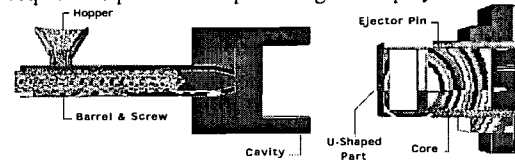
Injection Molding tooling required to produce a simple U-shaped part.
